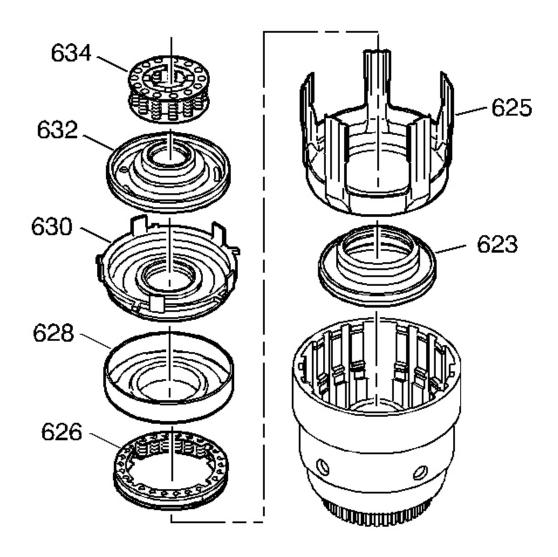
Input Clutch Assembly Courtesy of GENERAL MOTORS CORP.
